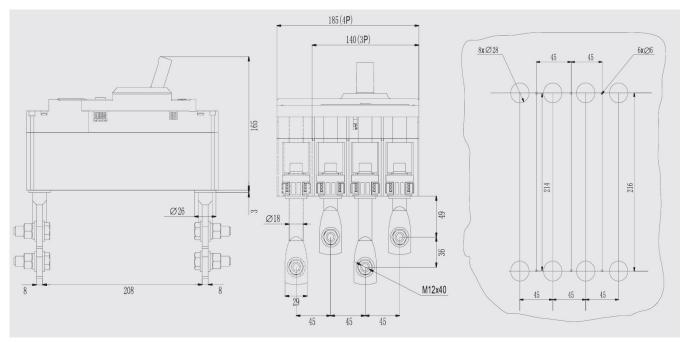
3P, 4P Outline overall dimensions and installation dimensions of wiring products behind the board
